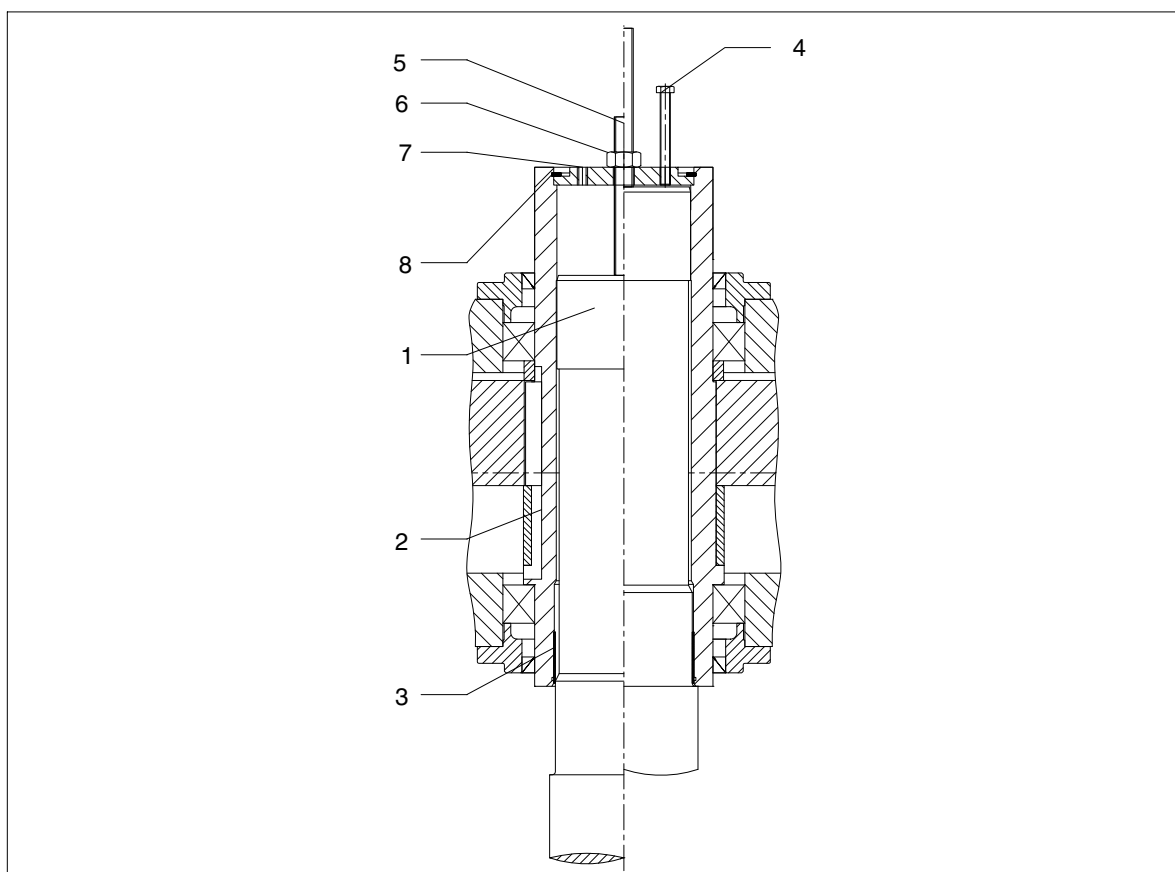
Hollow shaft in shrink-disk design, fitting with integrated DU bush
